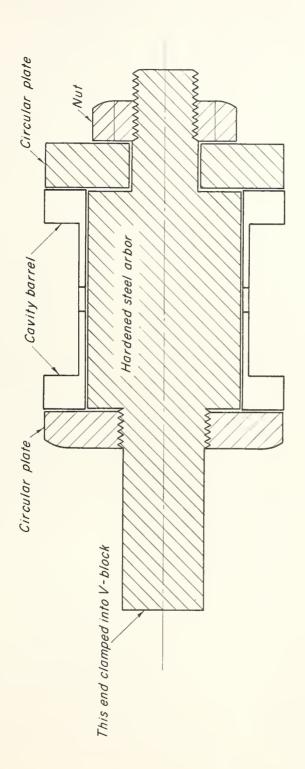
FIG. I ARBOR FOR HOLDING CERAMIC SAMPLING CAVITY BARREL DURING GRINDING
